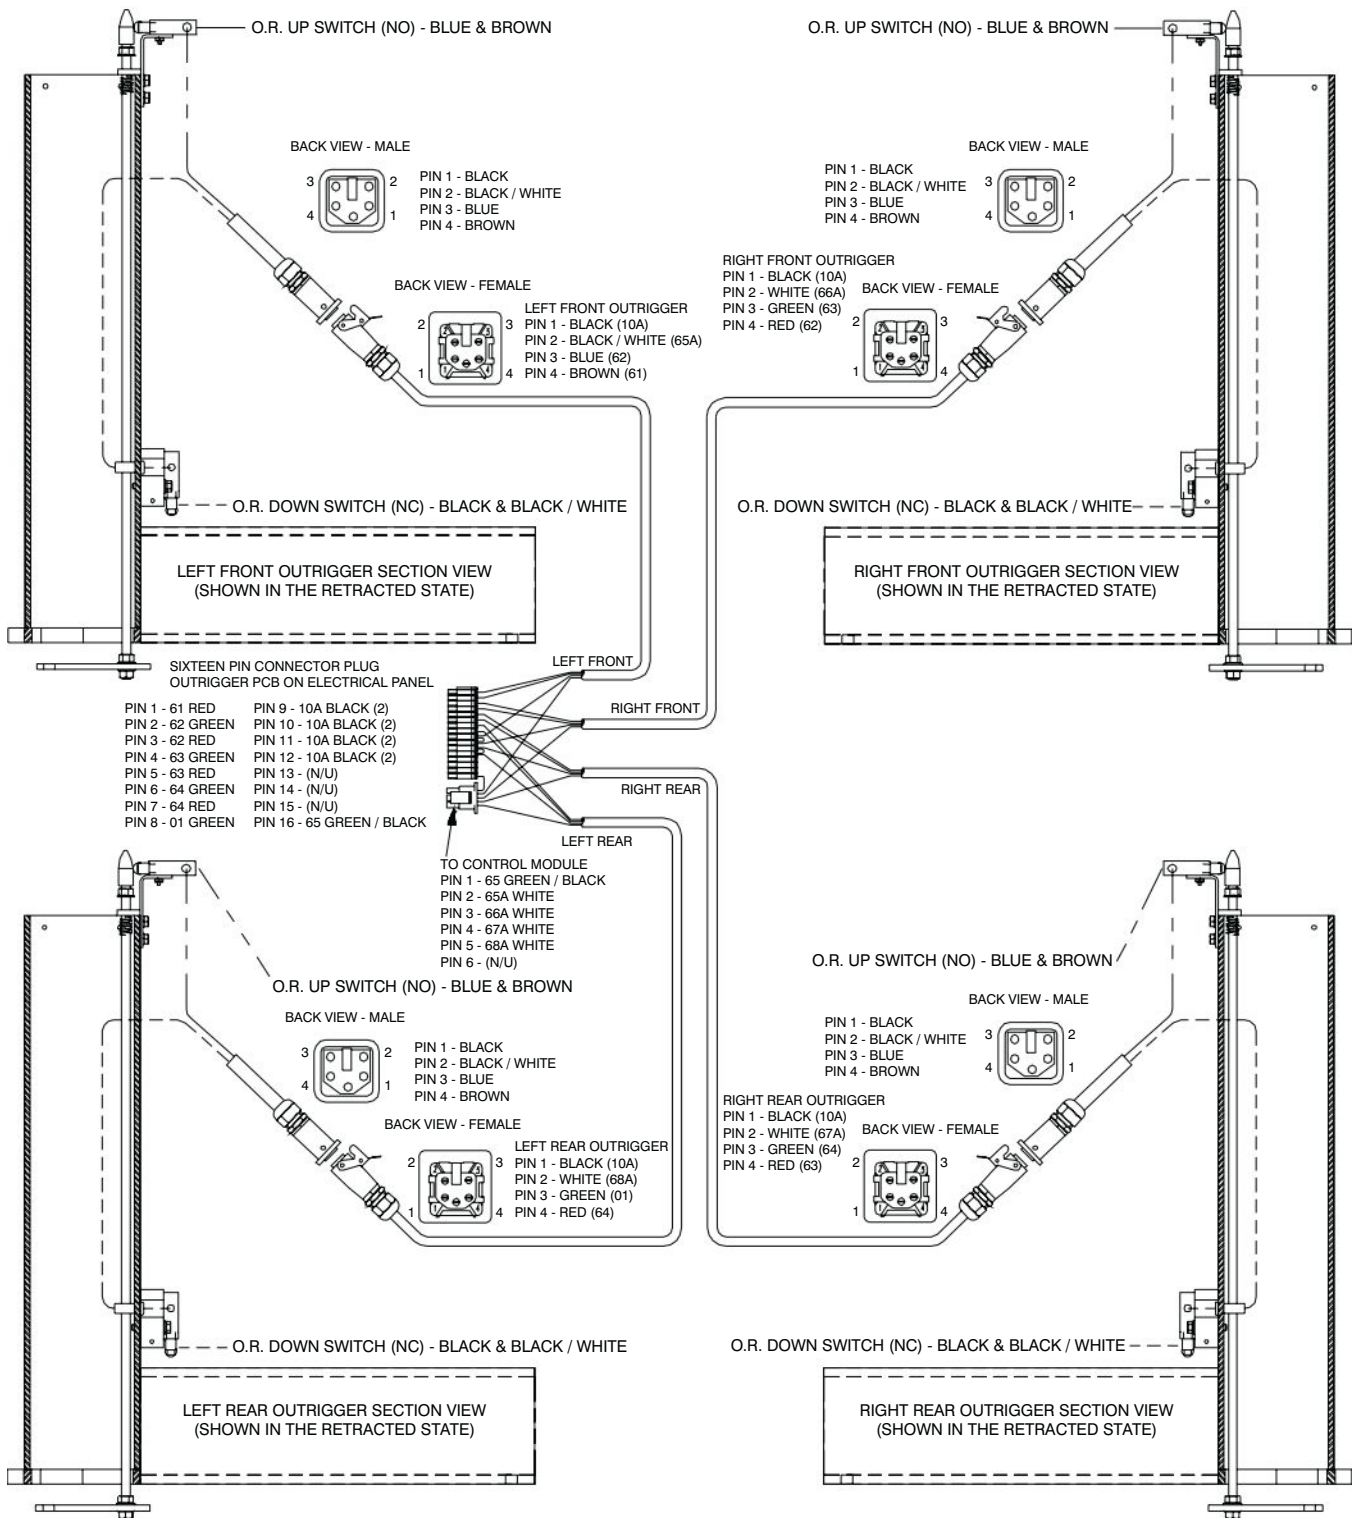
Outrigger Mechanical Limit Switch Wiring
